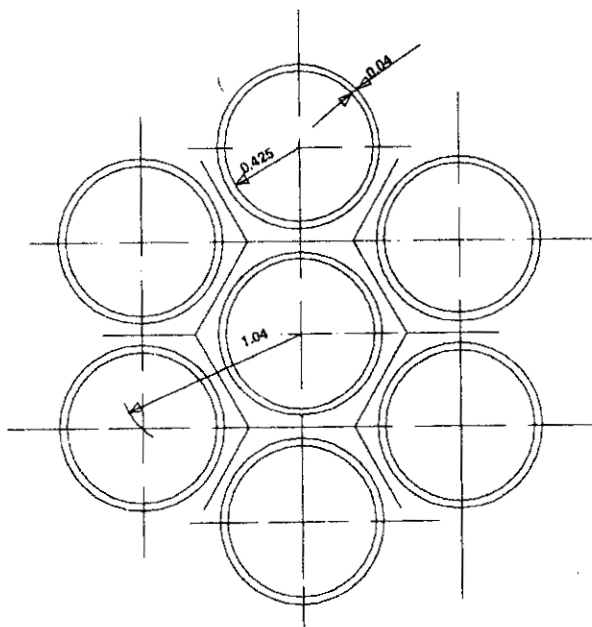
Cell Dimension in the Hexagonal Structure of the Fuel Rods in the Investigated Blanket.
